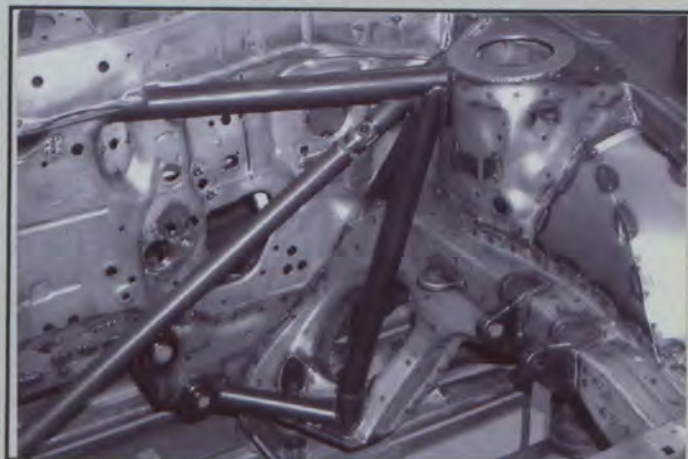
FRONT HOOP TO FLOOR (LEFT)
